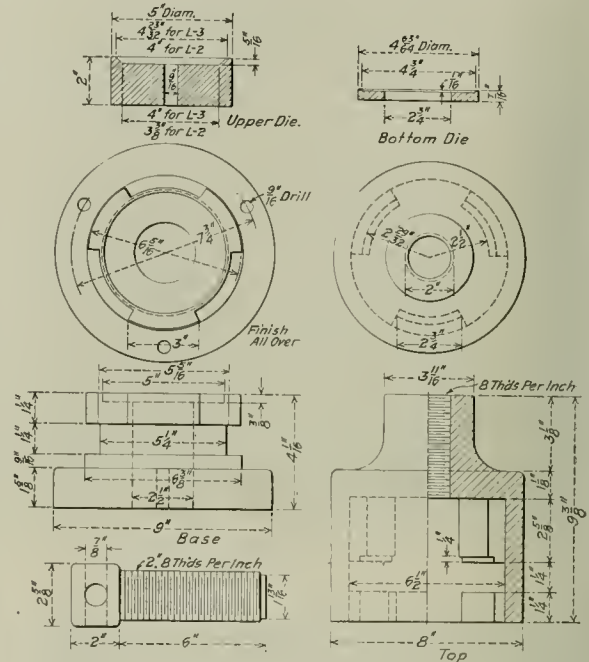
Press for Closing Triple Valve Piston Ring Grooves
